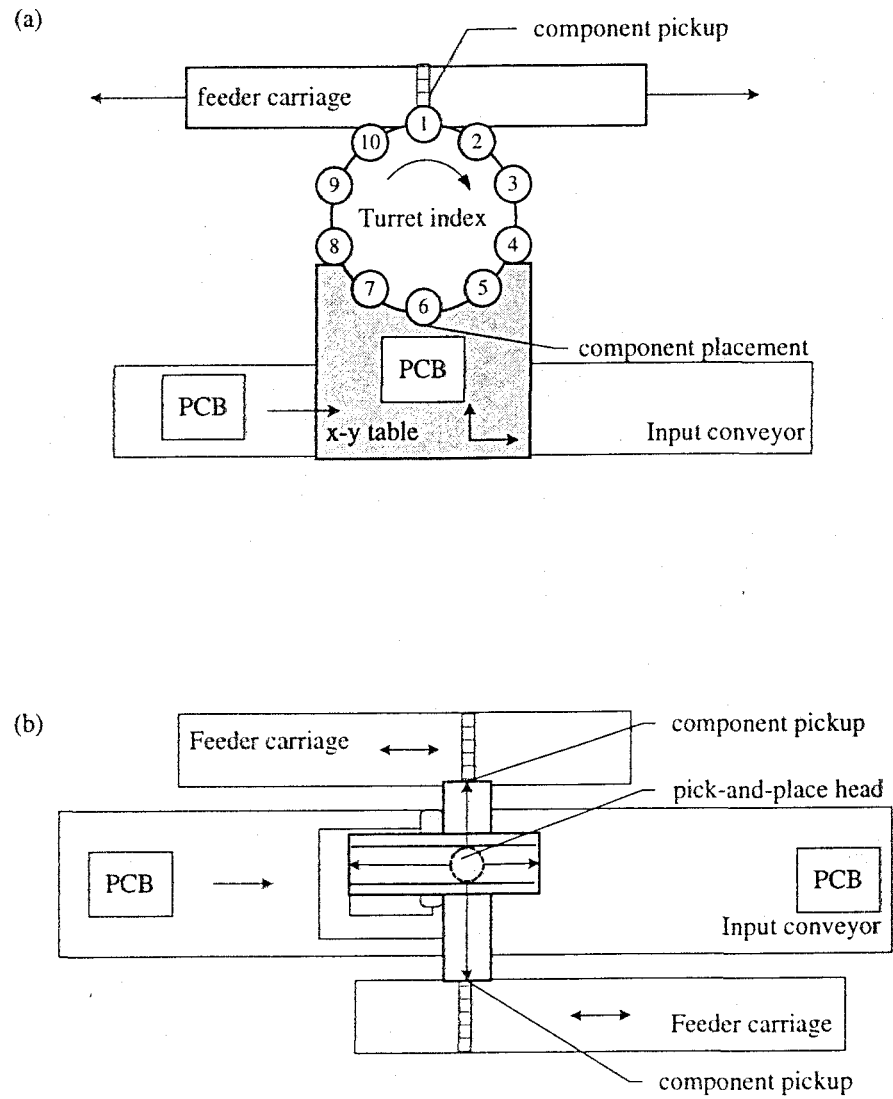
Pick-and-place machine with (a) rotary turret design (b) gantry design
